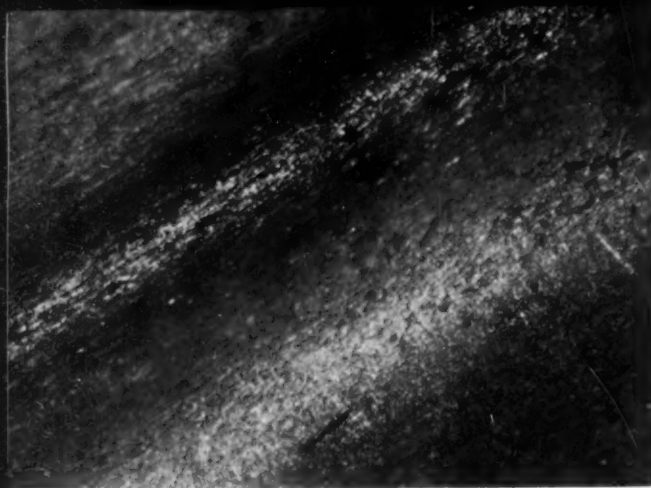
Appearance of Sheet Surface After Bending Over a 1/16-in. Radius ($1\frac{1}{2}T$). Note extreme orange peeling and surface fissures. 12×
